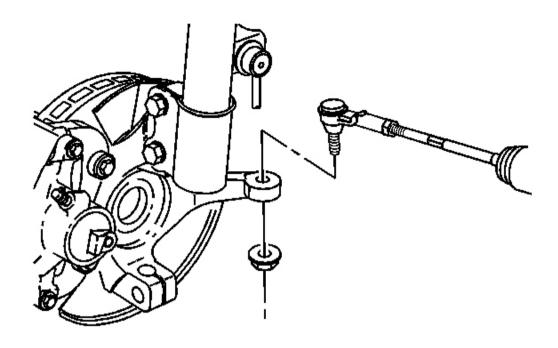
Tie Rod To Knuckle View Courtesy of GENERAL MOTORS CORP.
